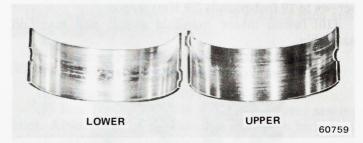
B-156 Scoring Caused by Insufficient Lubrication
